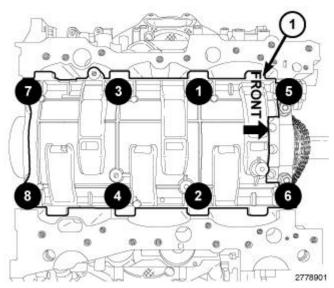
Windage Tray With Main Bearing Cap Bolts Installation Sequence Courtesy of CHRYSLER GROUP, LLC
